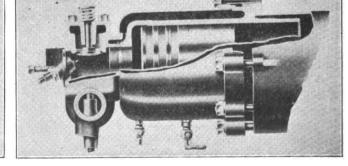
THE CADILLAC SINGLE-CYLINDER MOTOR
